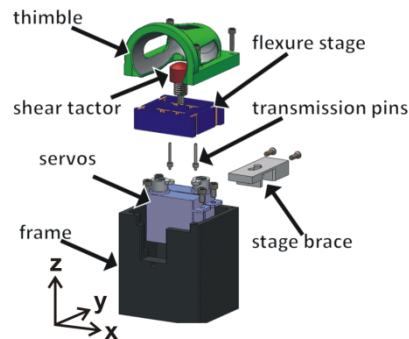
Exploded assembly view of tactile display, along with device reference frame.
